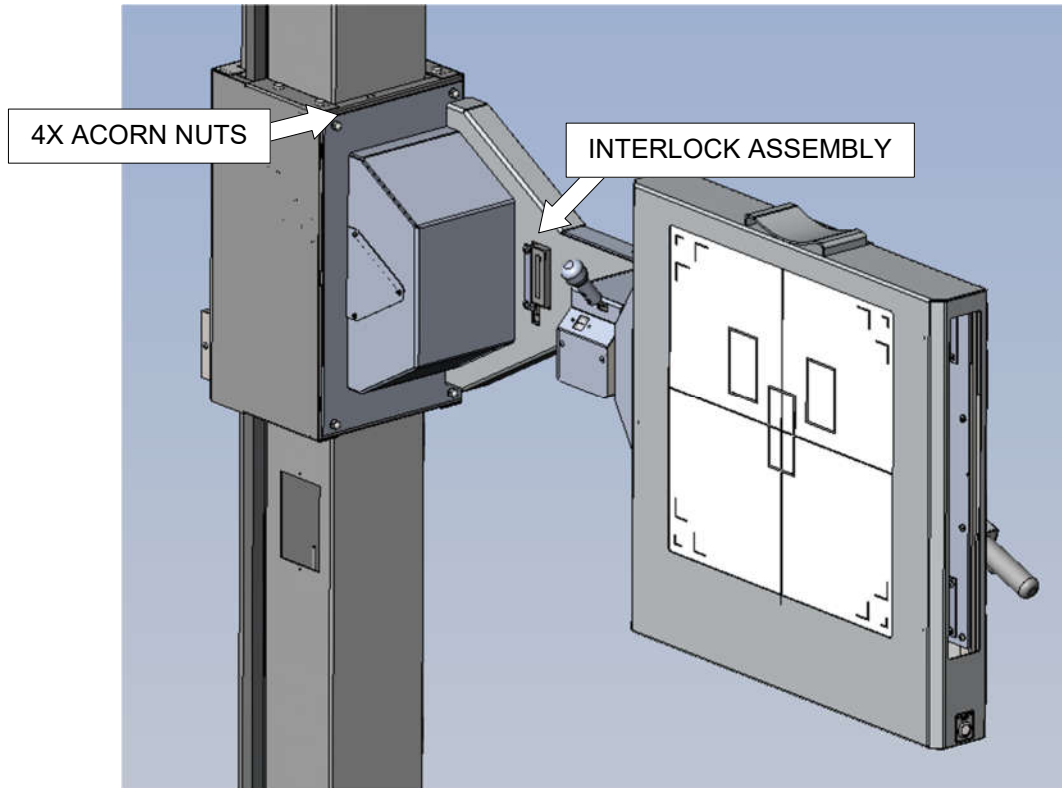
SRS J1000 Arm Assembly (Shoot Right Shown)
